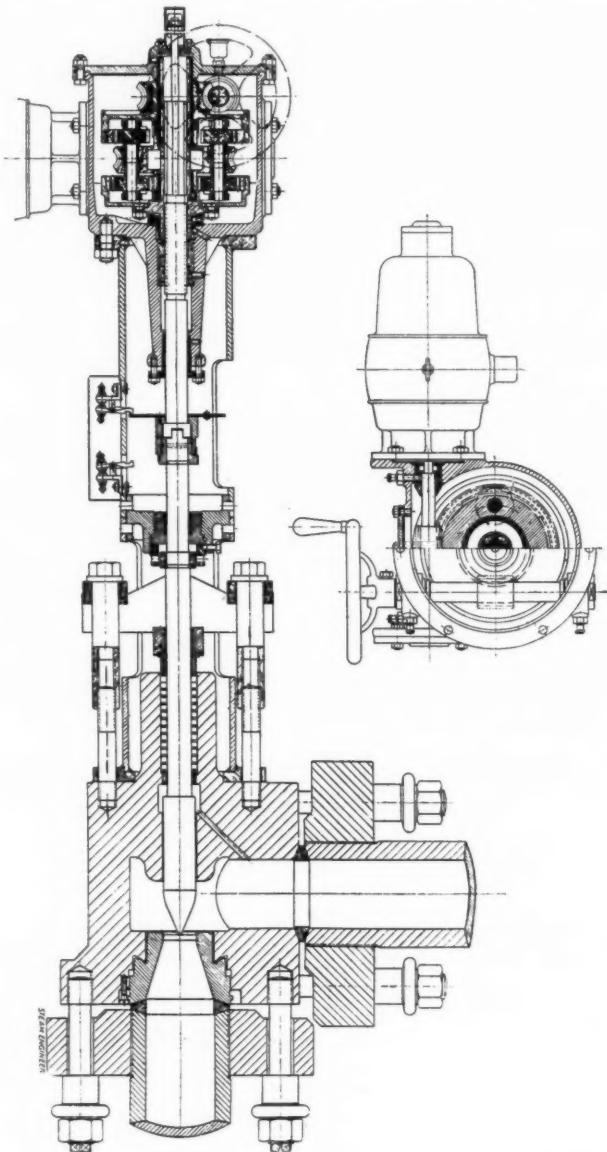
HIGH-PRESSURE REGULATING VALVE FOR THE BENSON BOILER
